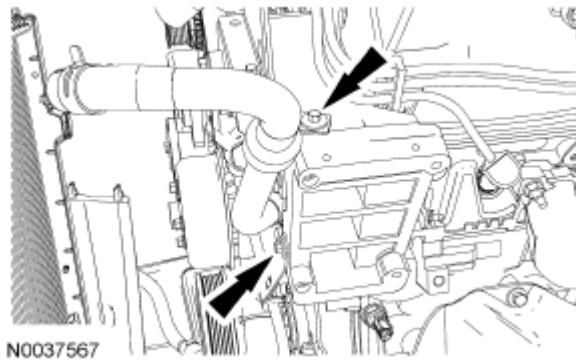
Locating Steering Pump Supply Hose Bracket Bolts
